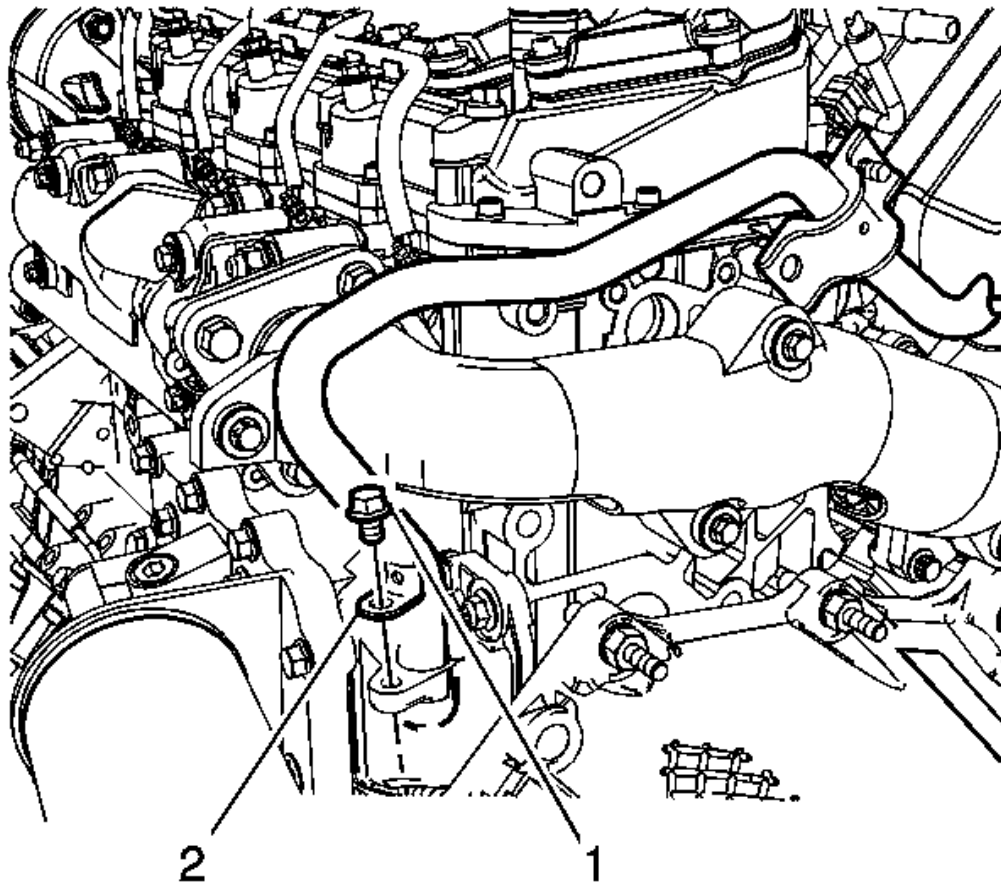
Identifying EGR Cooler Pipe Bolt & Bracket
